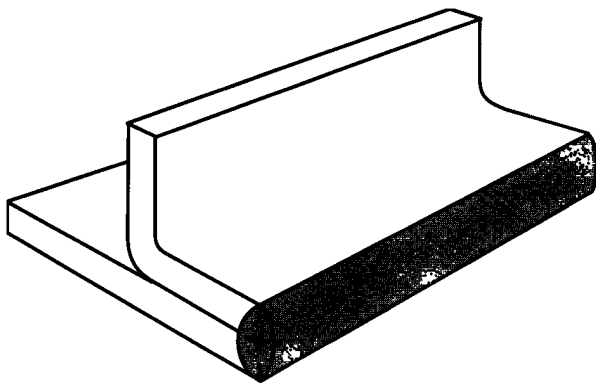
Edge Weld in a Flanged Corner Joint
